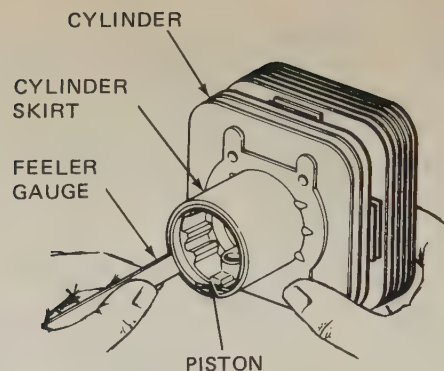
Measuring piston clearance with a feeler gauge. (Outboard Marine Corporation)
